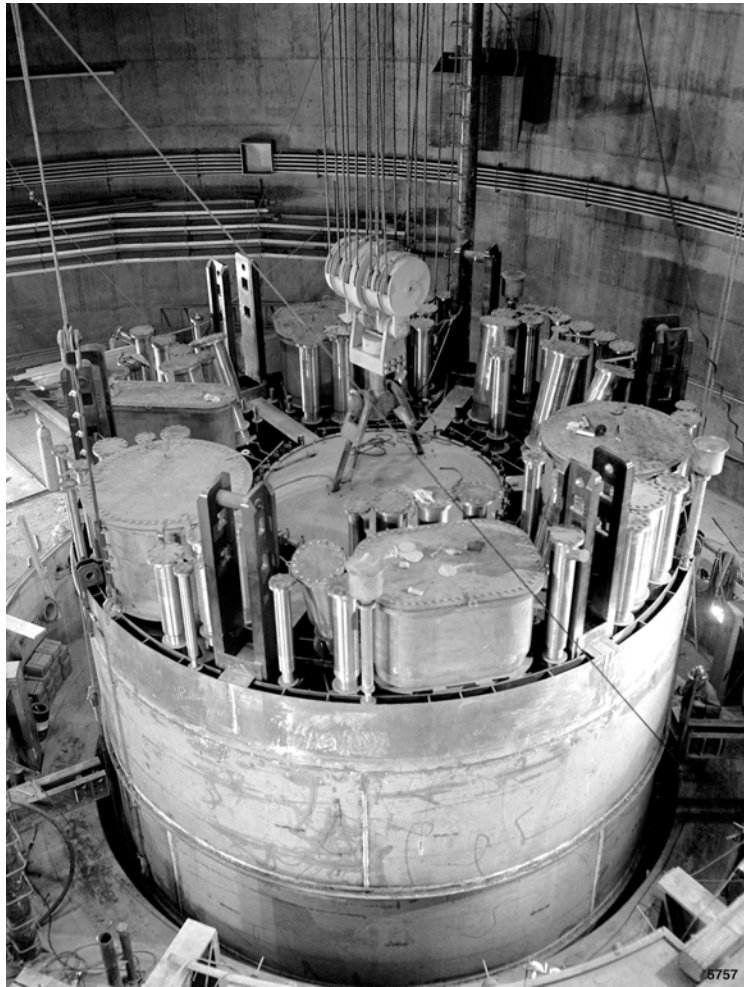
INNER TANK WELDED TO THE COVER.
